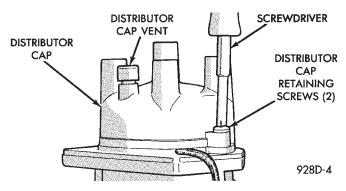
Distributor Cap Retaining Screws—2.5L Engine
